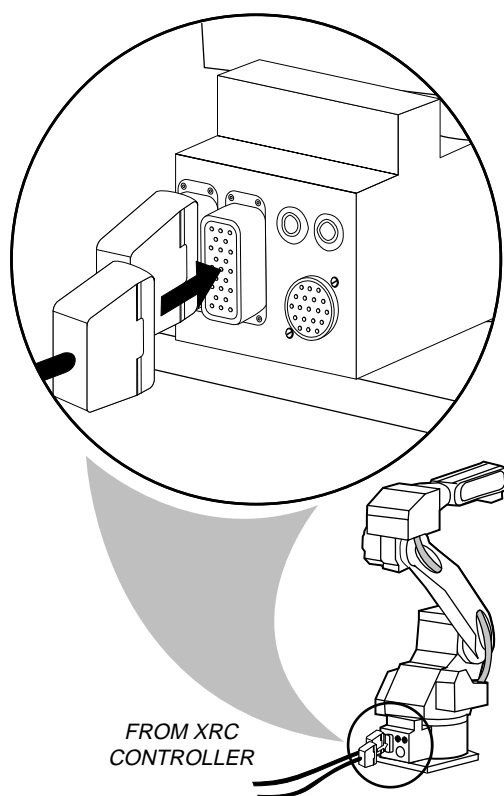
Robot Cables and Hoses Connecting the XRC to the Robot
